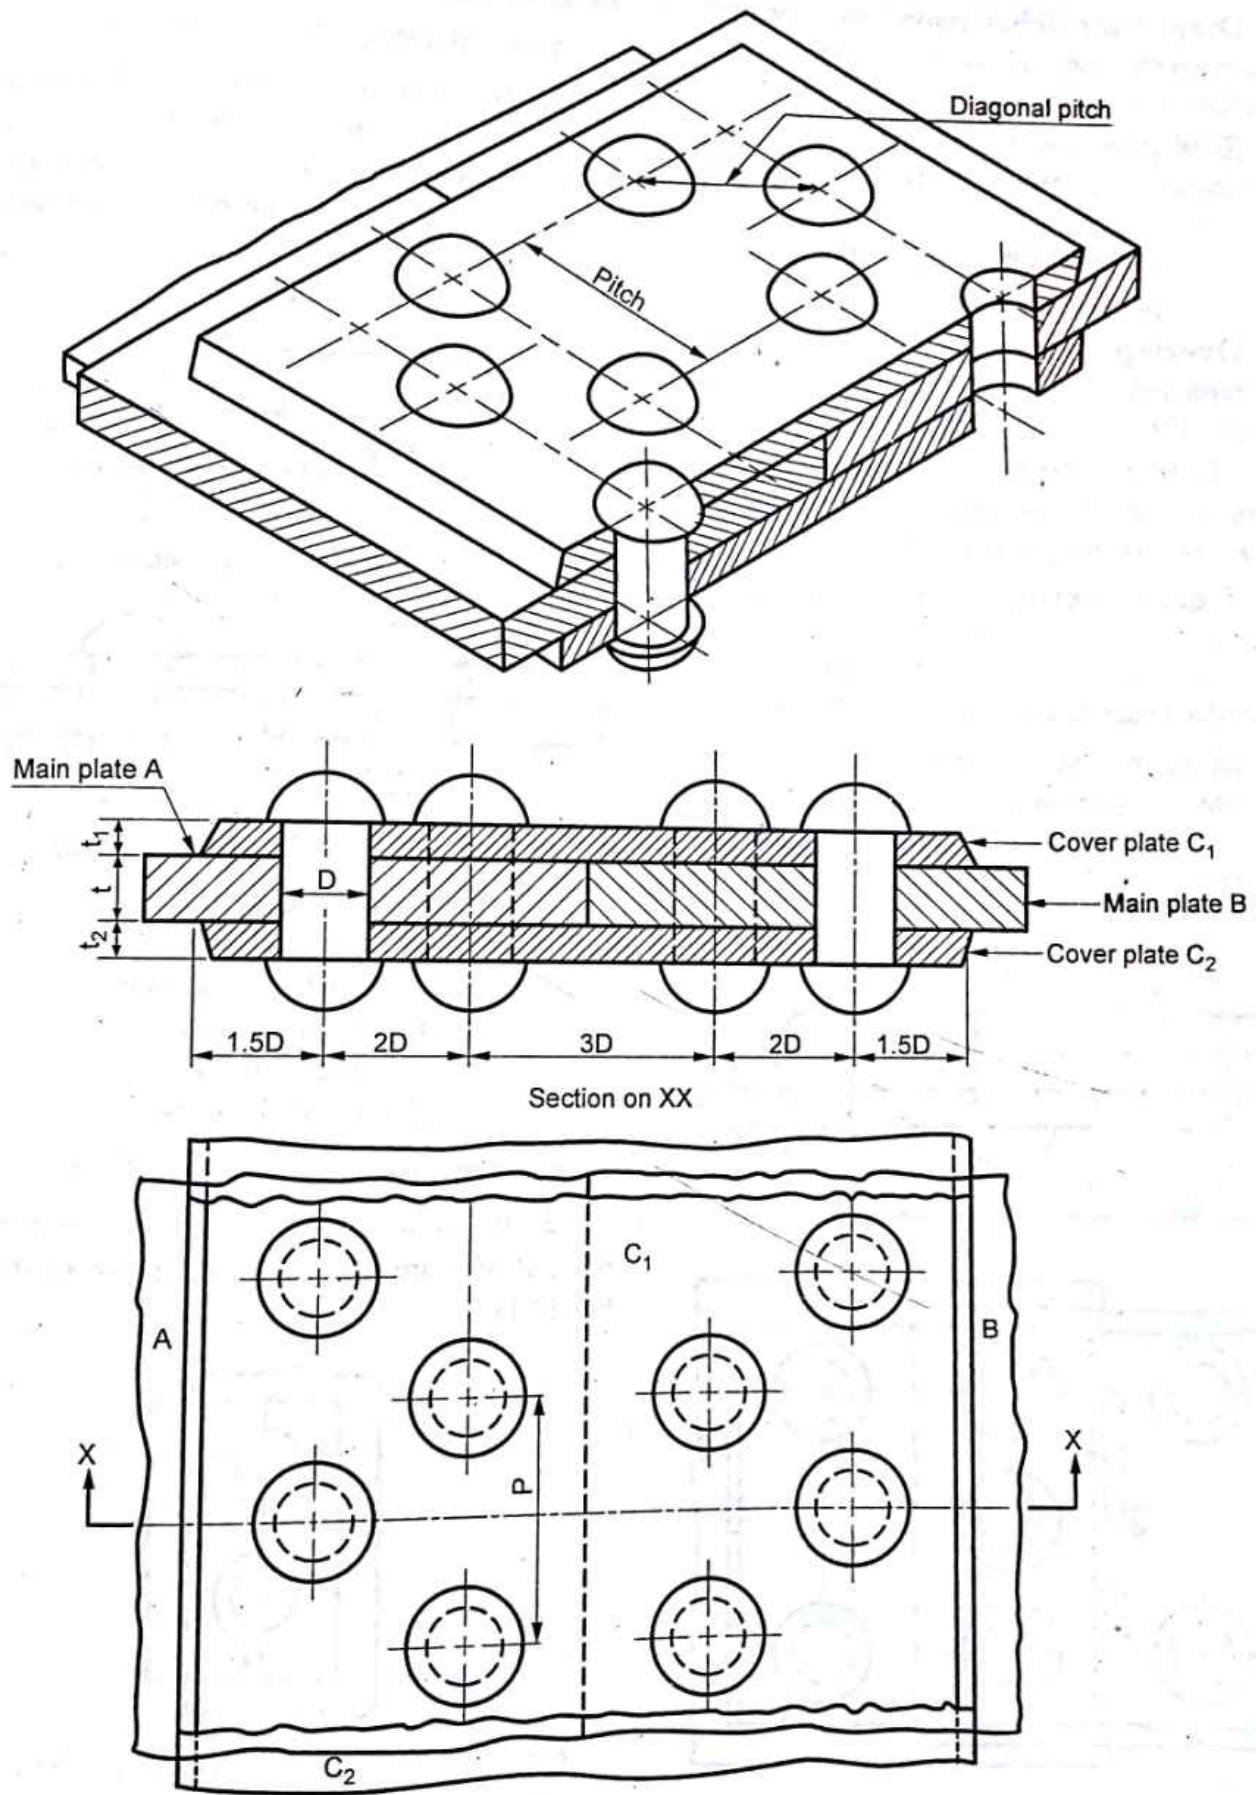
Double riveted butt joint, double cover plate, zigzag riveting
